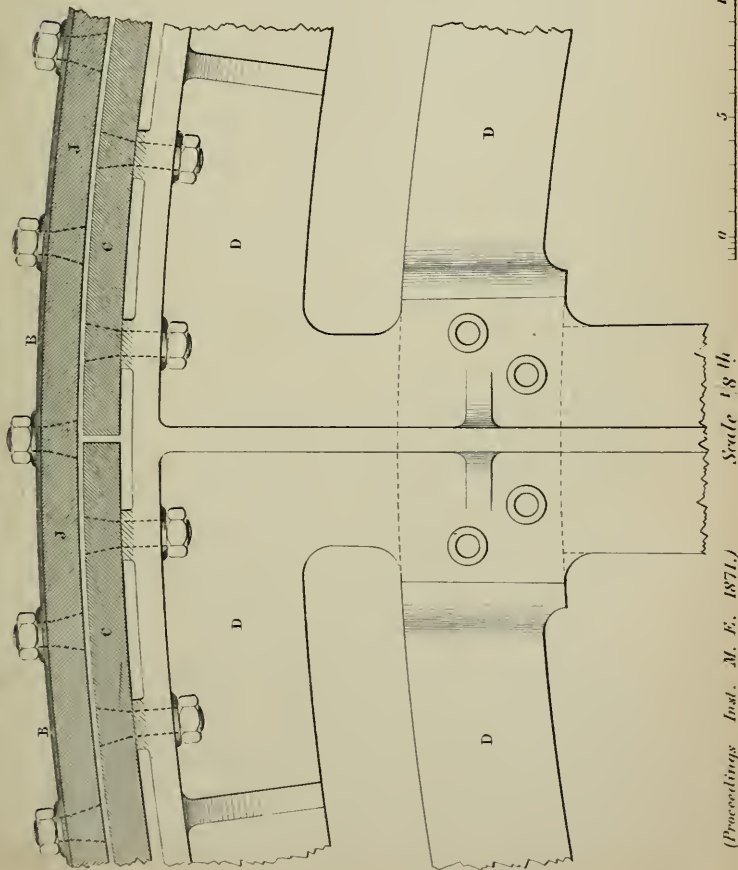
Elevation of Break Blocks and Rim of Drum.
